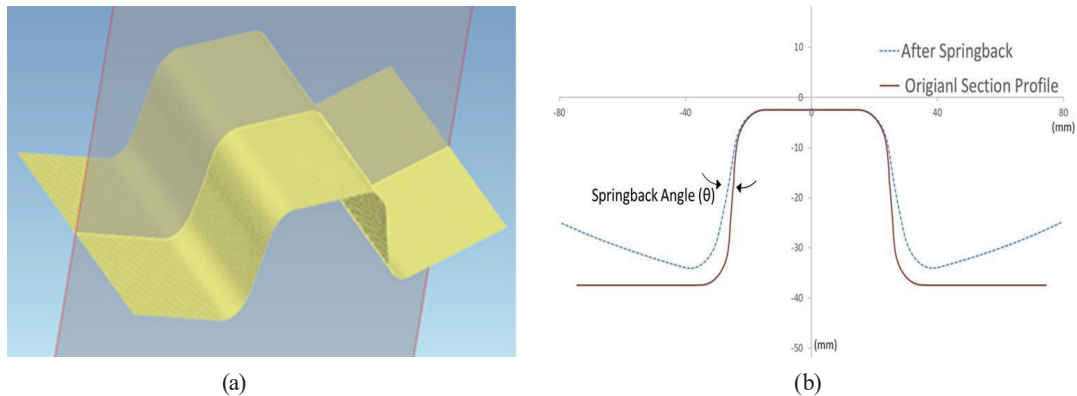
(Color online) (a) Schematic of the sectioning plane for springback measurement and (b) definition of springback angle ( $\theta$ ).
